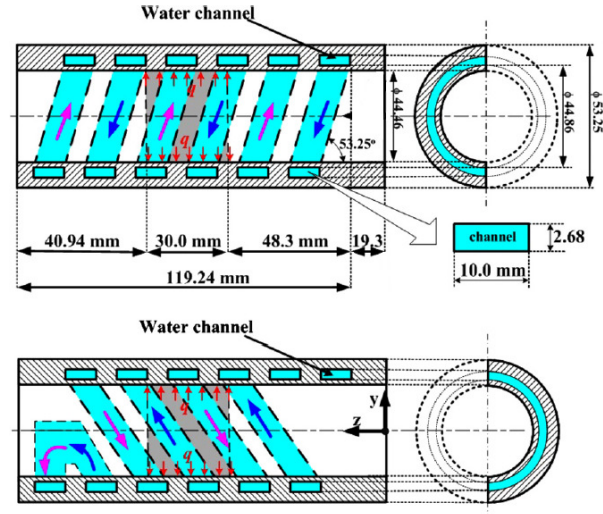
The physical model of the built in motorized spindle with a helical channel [5]
